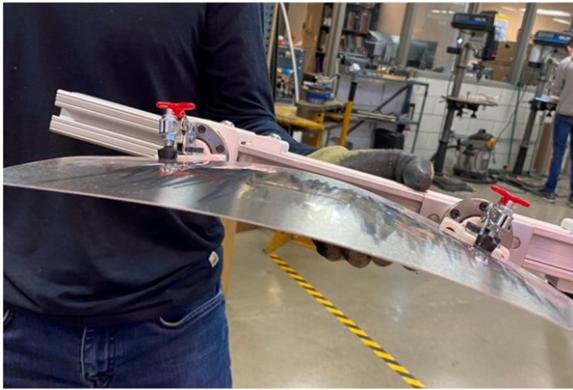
The flexible gripper is shown being able to adapt to the shape of the sheet that has significantly deformed by the English wheel.
